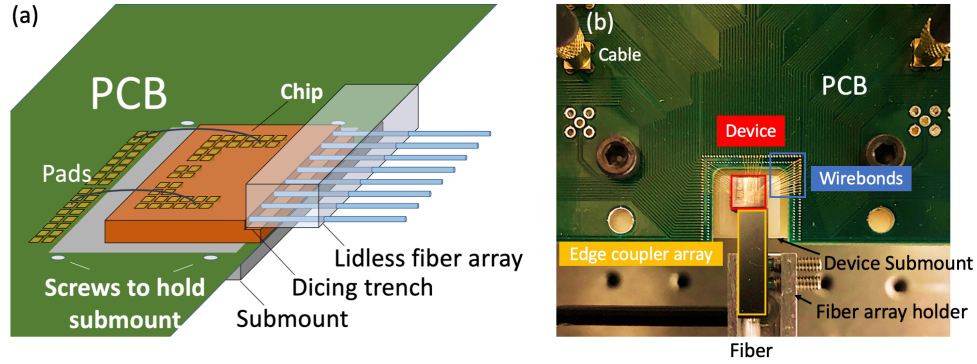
(a) Schematic of a silicon die wire bonded onto a breakout PCB. A lidless fiber array is attached to the edge of the silicon chip. (b) Photo of the packaged AIM switch device by wire bonding on the breakout PCB.
